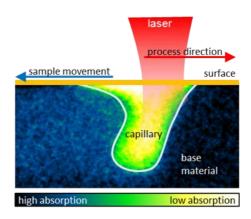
Typical X-ray image of a deep-penetration welding process.
